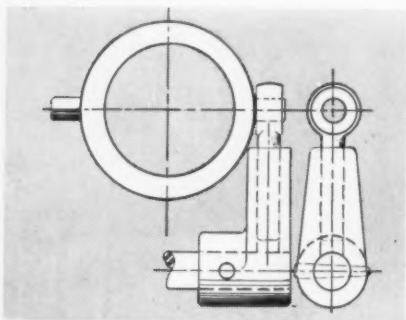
In this design, the shifting arms are two distinct castings instead of being joined together as in the assembly shown in Fig. 39.
